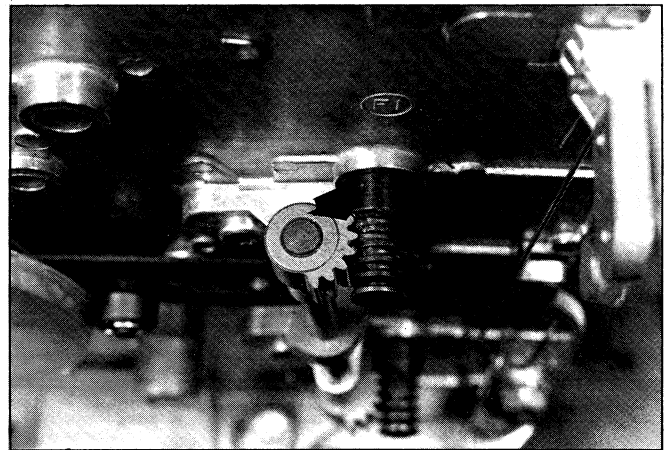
Segment gear inner tooth meshing with innermost groove in front wheel shafts.
